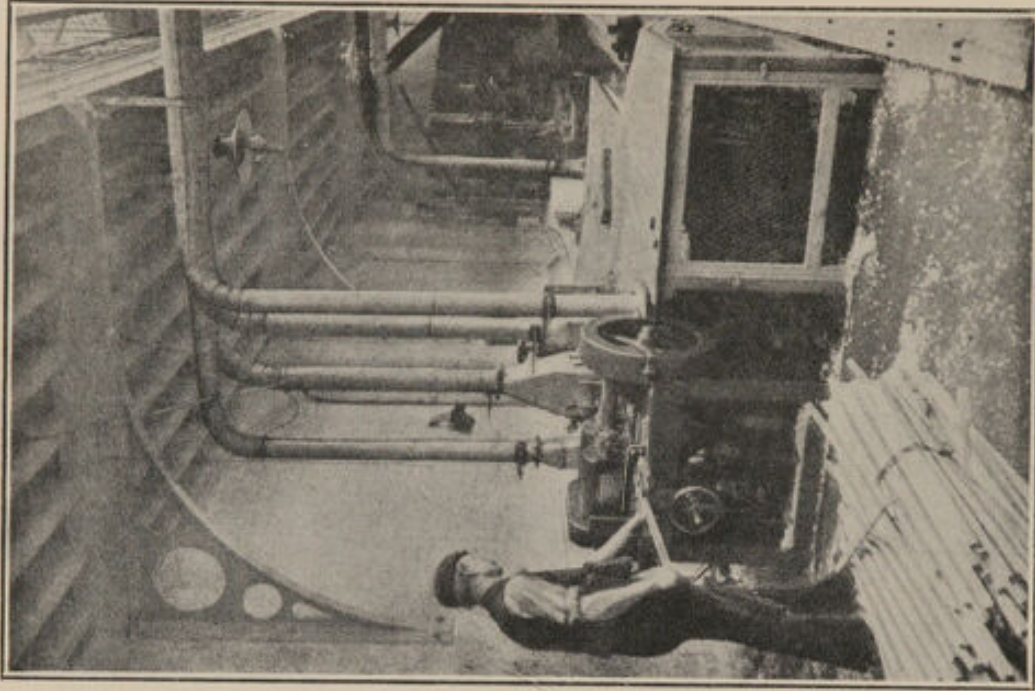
Exhaust applied to Wood Planer, showing Hoods and Branch Pipes. (Messrs. Sturtevant Engineering Co., Ltd., London.)
